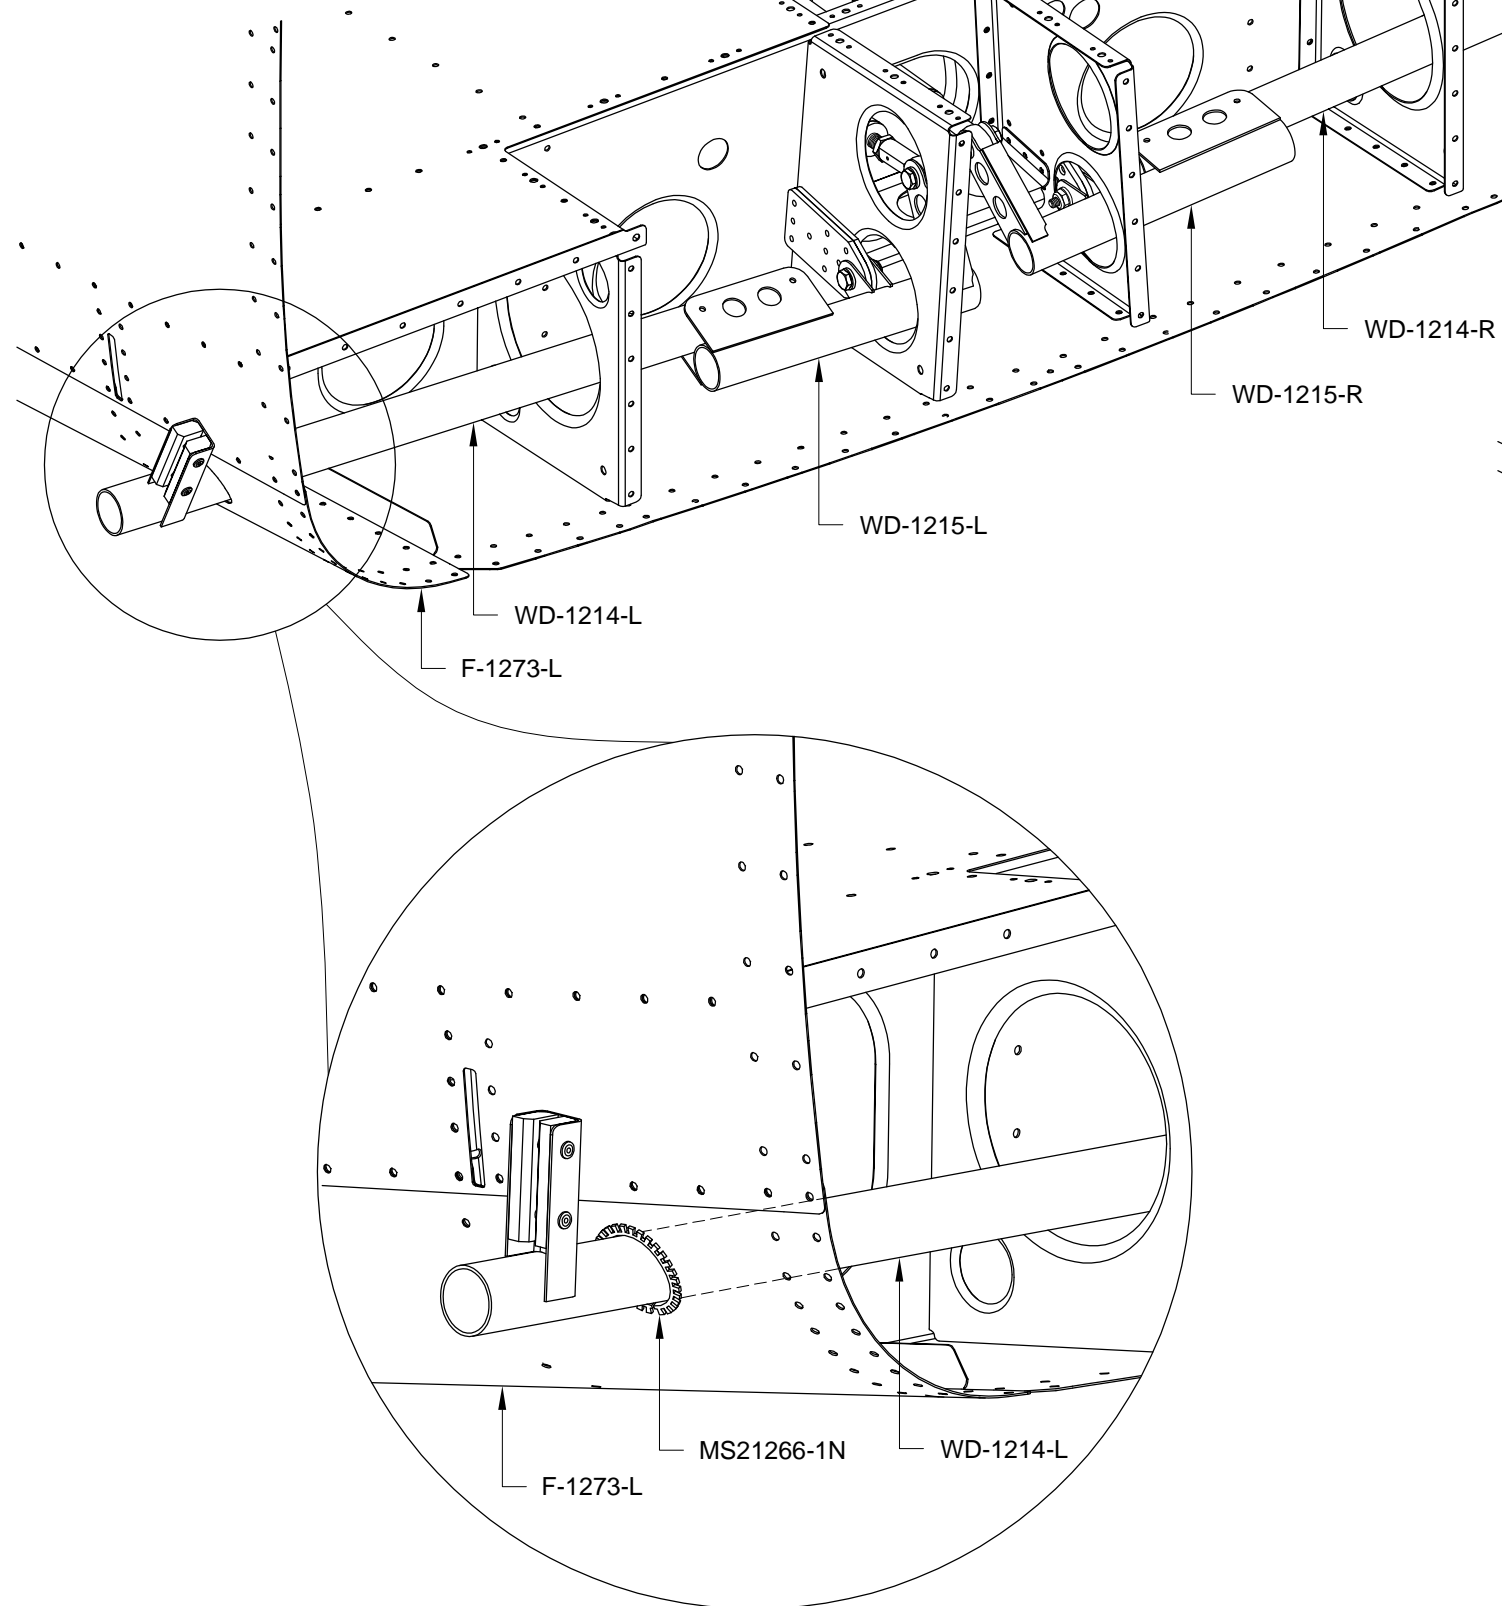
INSTALLING THE FLAPERON TORQUE TUBE
